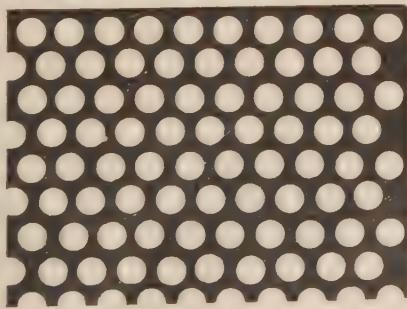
Section of Sieve: Holes 9/64 in. in Diameter.
